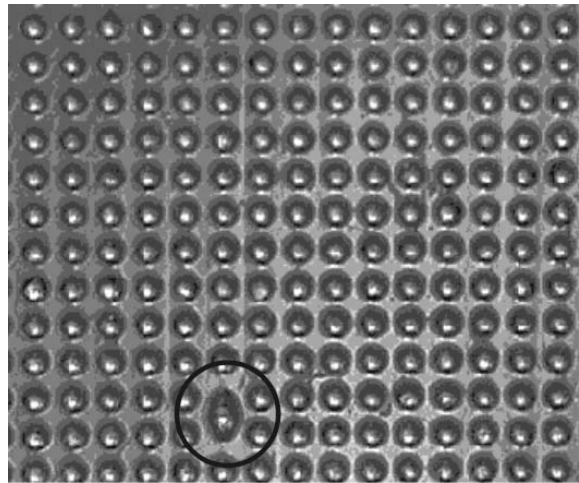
Example of double/bridging of 63Sn/37Pb solder bumps as marked by circle
